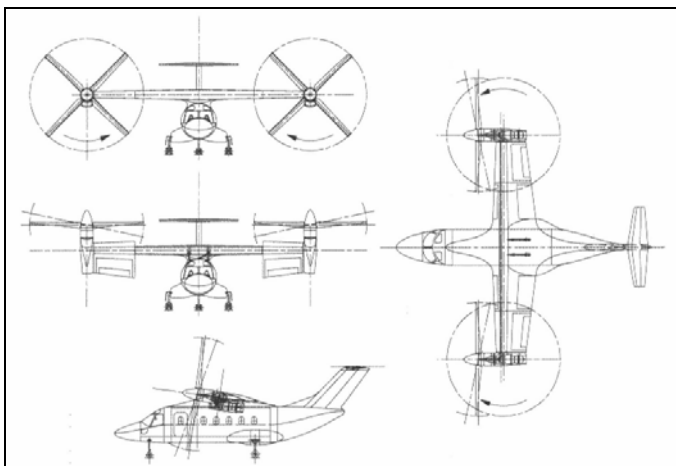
Three-view drawing of the ERICA tiltrotor. [30]
